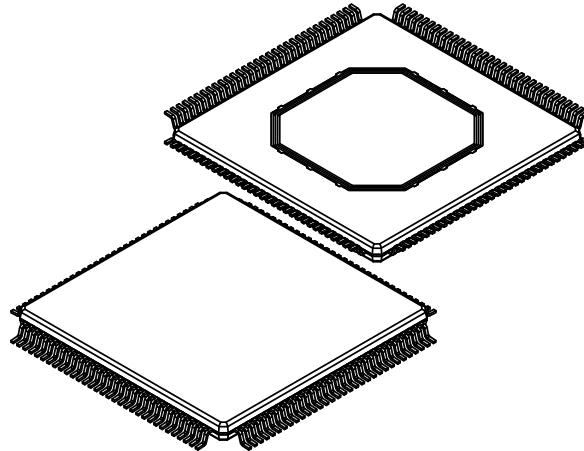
PACKAGE (DIMENSIONS)
